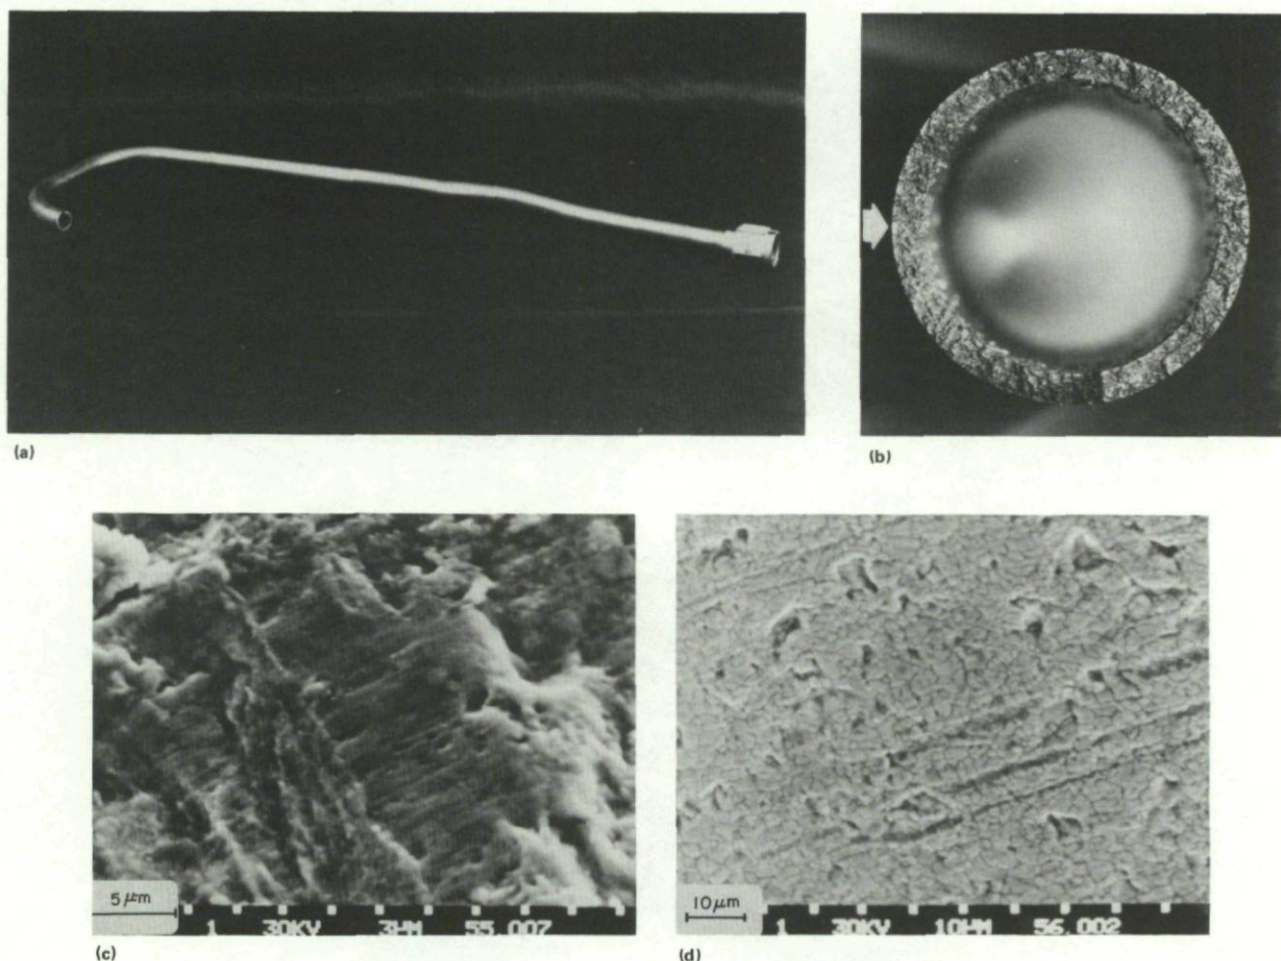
Corrosion fatigue of a 321 stainless steel hose assembly
